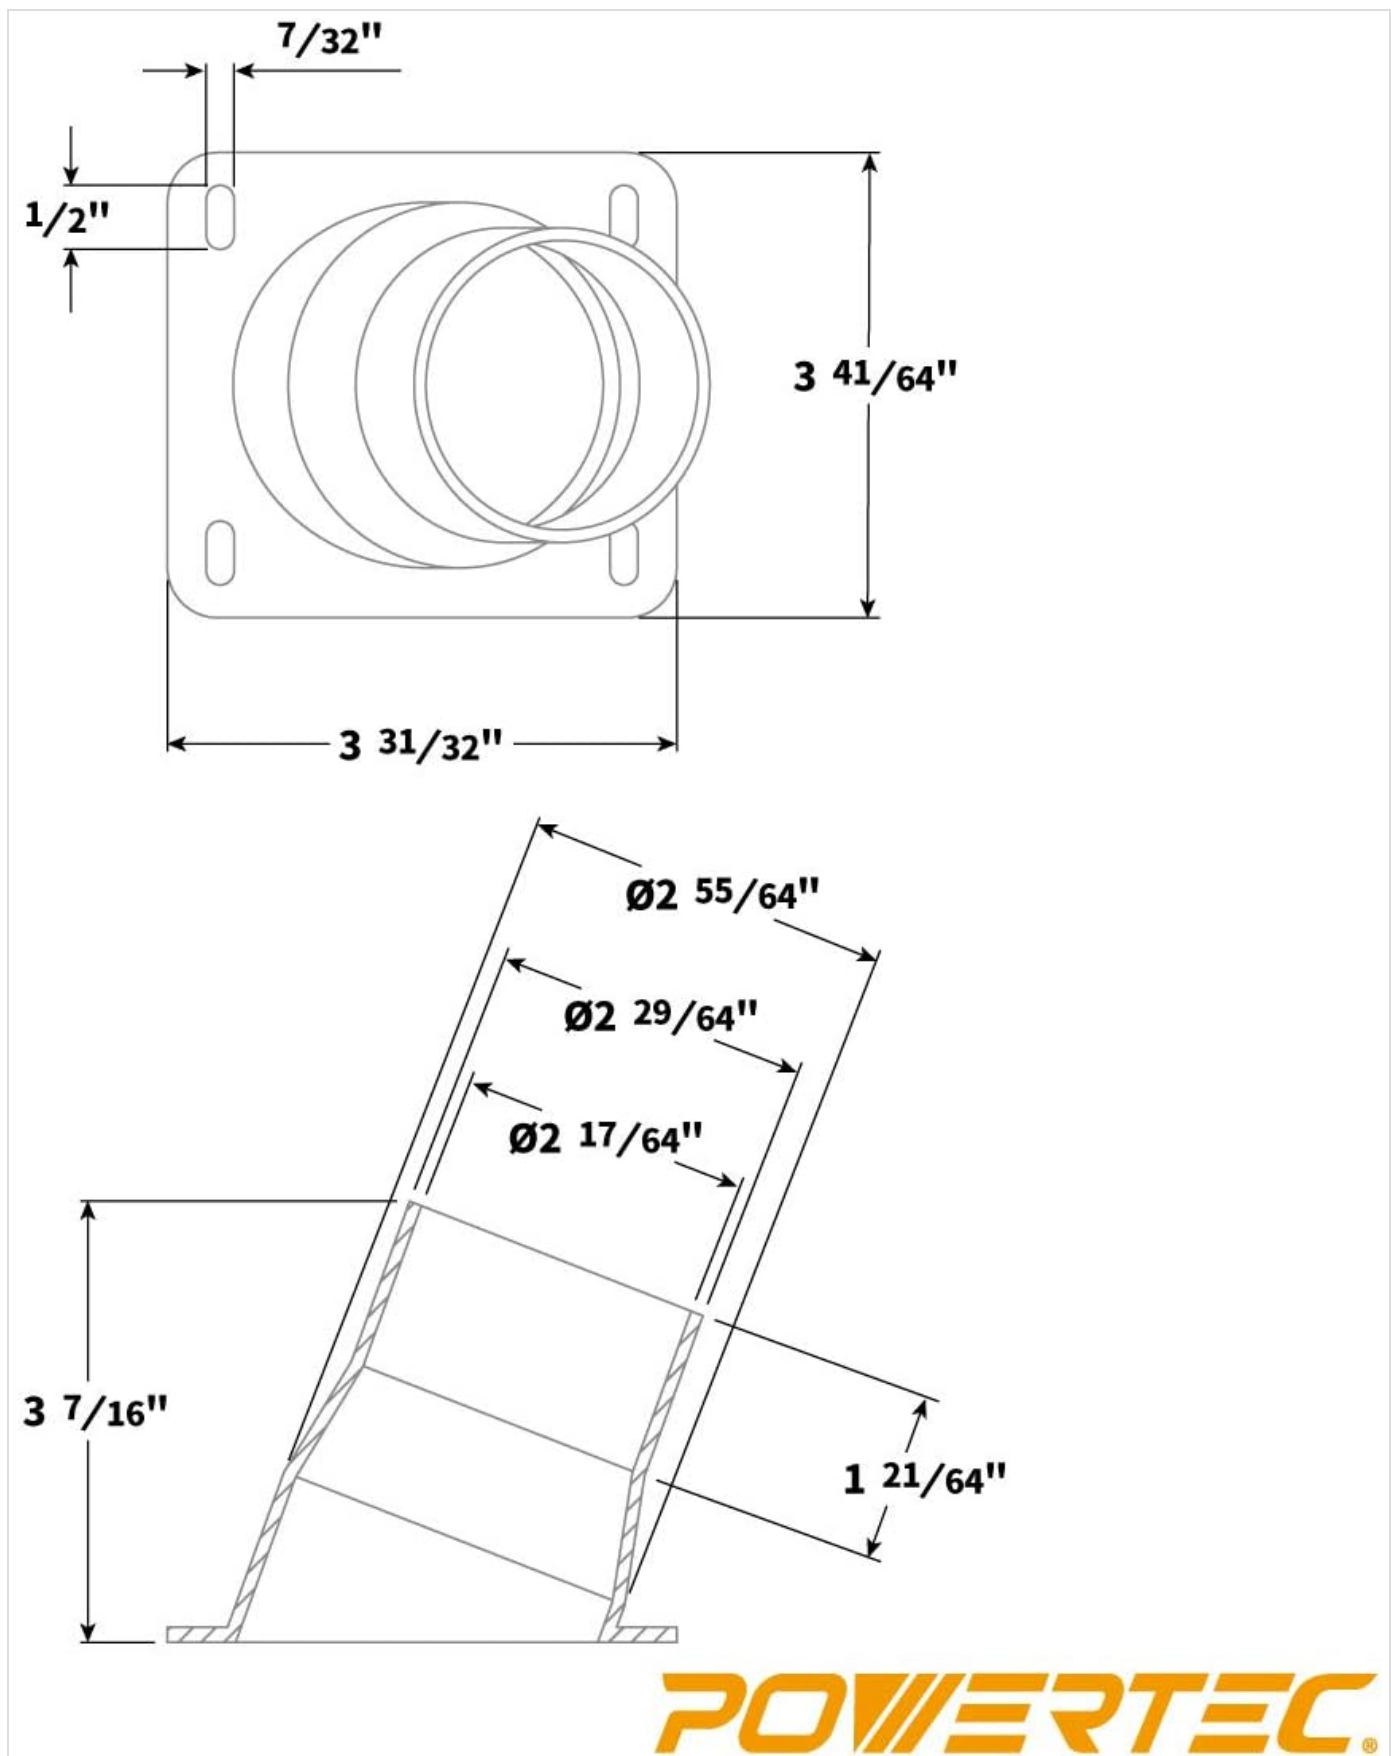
Detailed technical drawing showing the dimensions of the POWERTEC 70124 Universal Dust Port.
